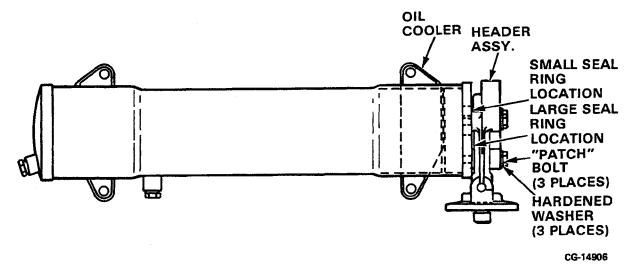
Coolant Filter Header to Oil Cooler Installation
